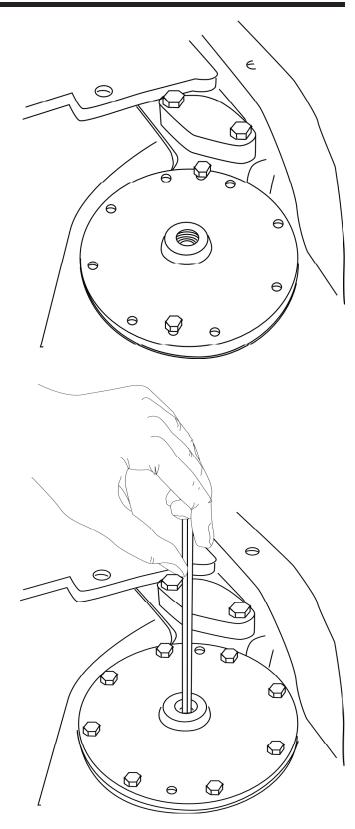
Gaterotor Thrust Bearing (VSG 301-701 Models)
